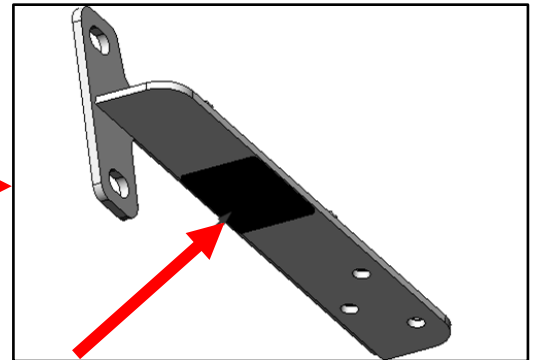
Install the DS mounting bracket 1 using the double bolt plate
